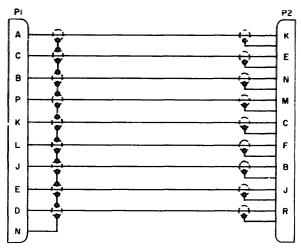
Cable Assembly, Special Purpose, Electrical CX-12726/U, wiring diagram.
